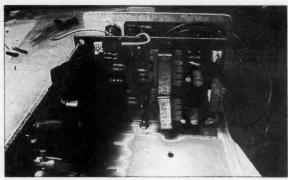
Photo C. Here is a view of the panel meter supply. The QRP bench PC board is mounted on edge.
